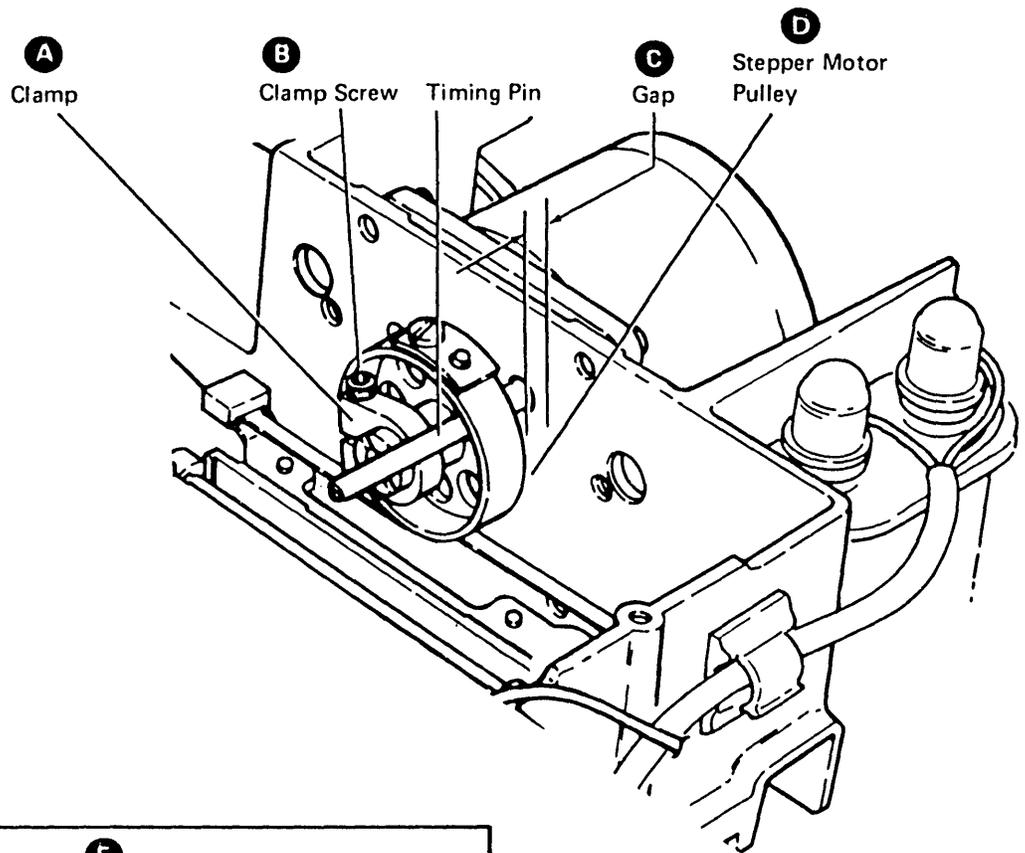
Stepper Motor Pulley and Clamp Removal and Replacement
